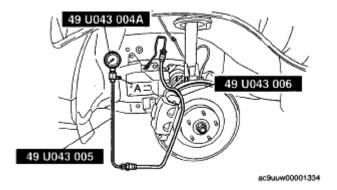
Installing Brake Pipe To SST Courtesy of MAZDA MOTORS CORP.
